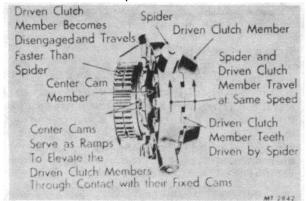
Forward Right Hand Turn (Cross Sectional View)
